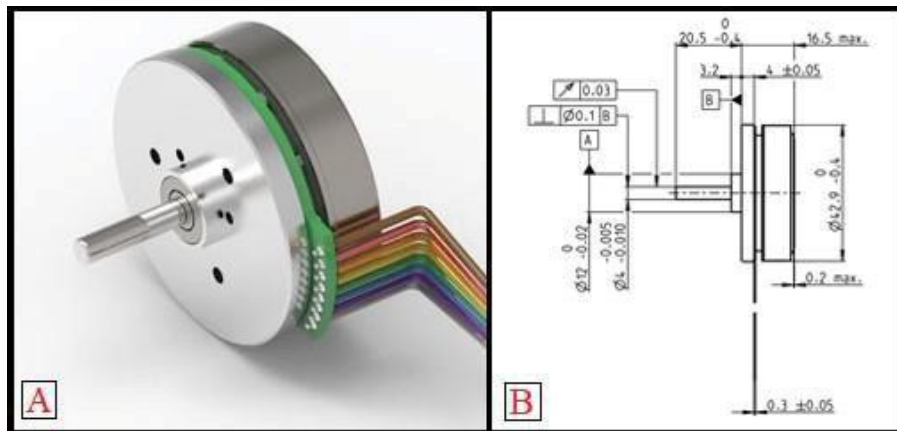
HPB actuator: A) Representation of the Maxon BLDC EC45 N339281 motor; and B) its physical dimensions.
